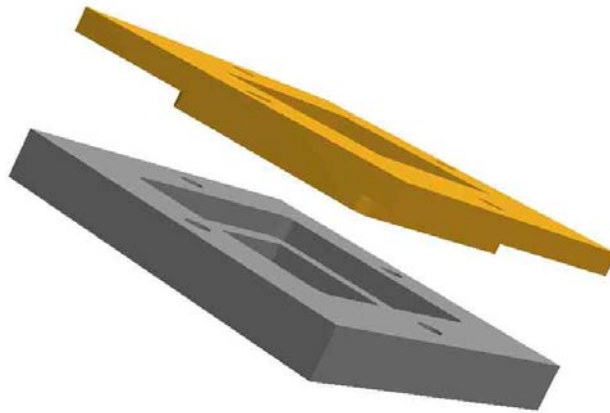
The gripper mechanism used to hold the skin material. The bronze color part is the male part, while the gray part is the female part.
